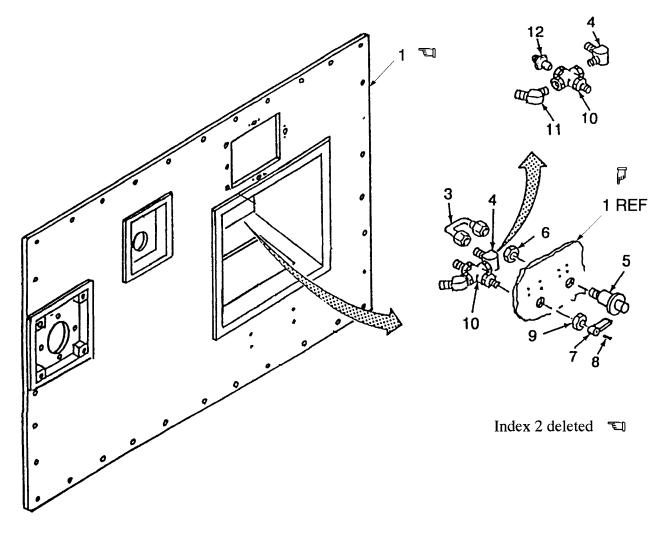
Rear Panel Disassembly (Sheet 1 of 3)
